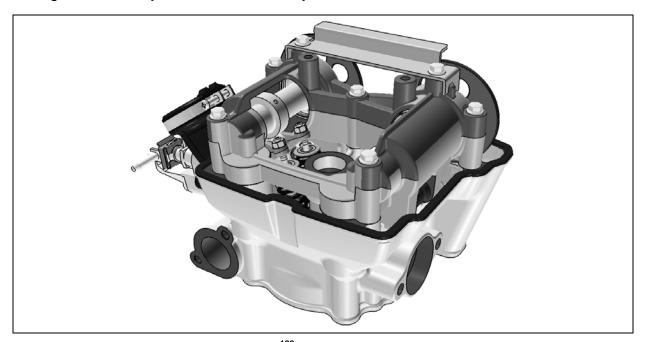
Cylinder Head Assembly - XY150¹⁸⁰
